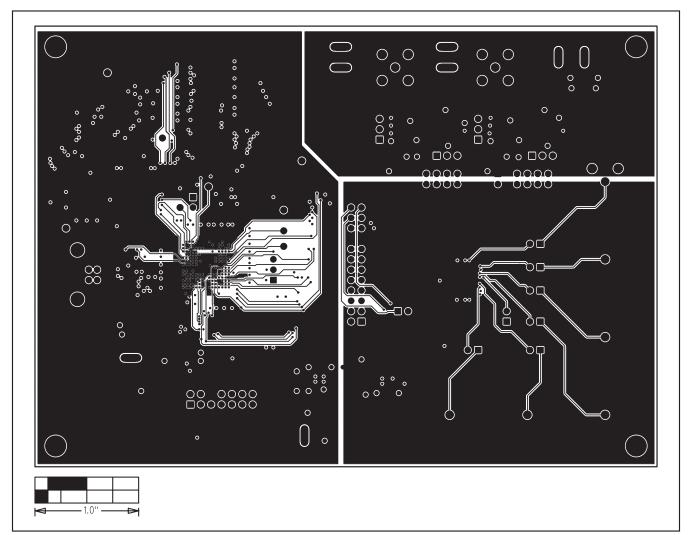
MAX11046 EV Kit PCB Layout—Inner Layer 3 (Power)
